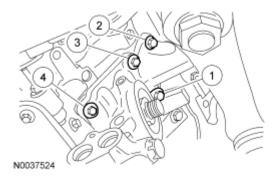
Oil Filter Adapter Bolts Torque Sequence Courtesy of FORD MOTOR CO.
